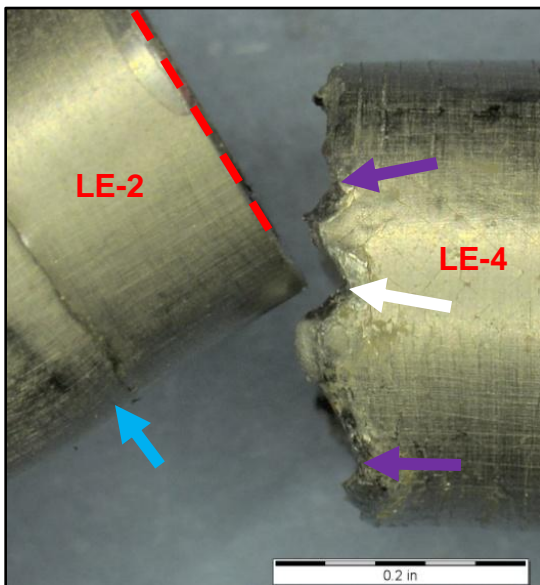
Fracture face LE-4 with the cut end of the link indicated by the red dashed line in Figure 21.
